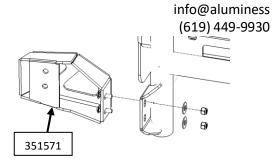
Heavy Duty Lower Hinge Bracket Installation
